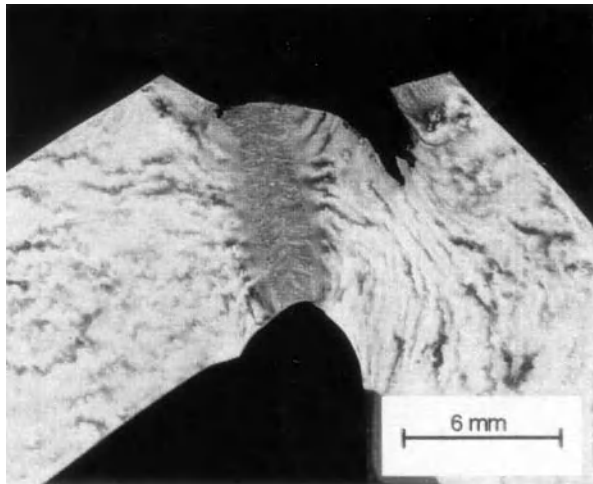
CO₂ laser beam weld of 12 mm thick non-alloyed steel (Institut de Soudure document)
